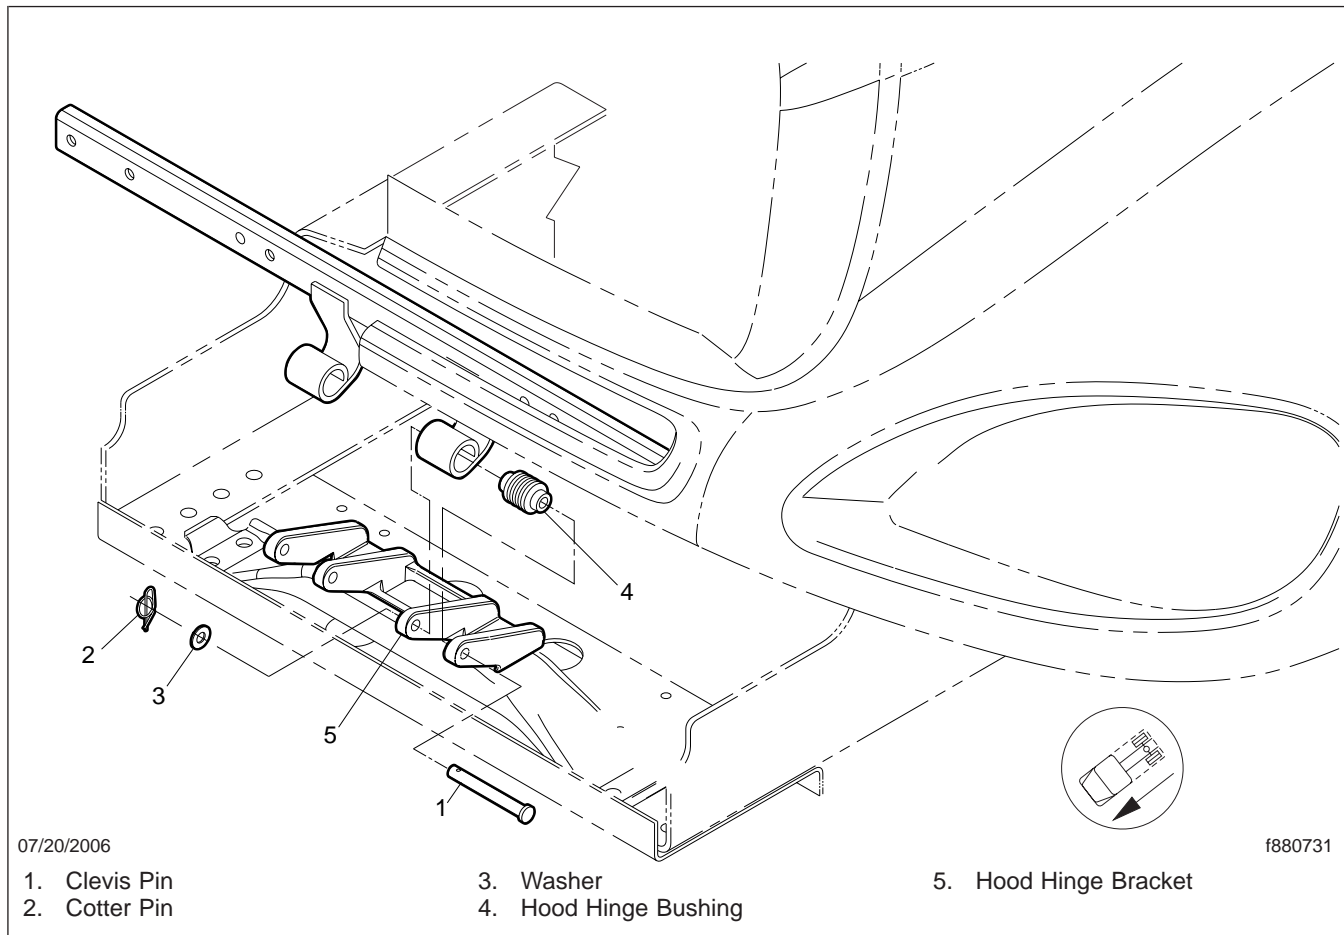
, Hood Installation (vehicles with engines manufactured through December 31, 2006)
